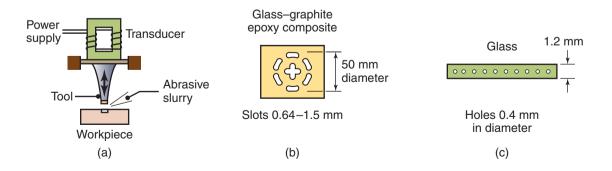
(a) Schematic illustration of the ultrasonic machining process. (b) and (c) Types of parts made by this process. Note the small size of the holes produced.
